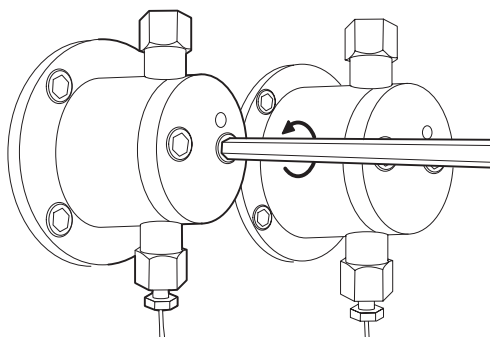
Unscrewing the Pump Head Mounting Bolts
